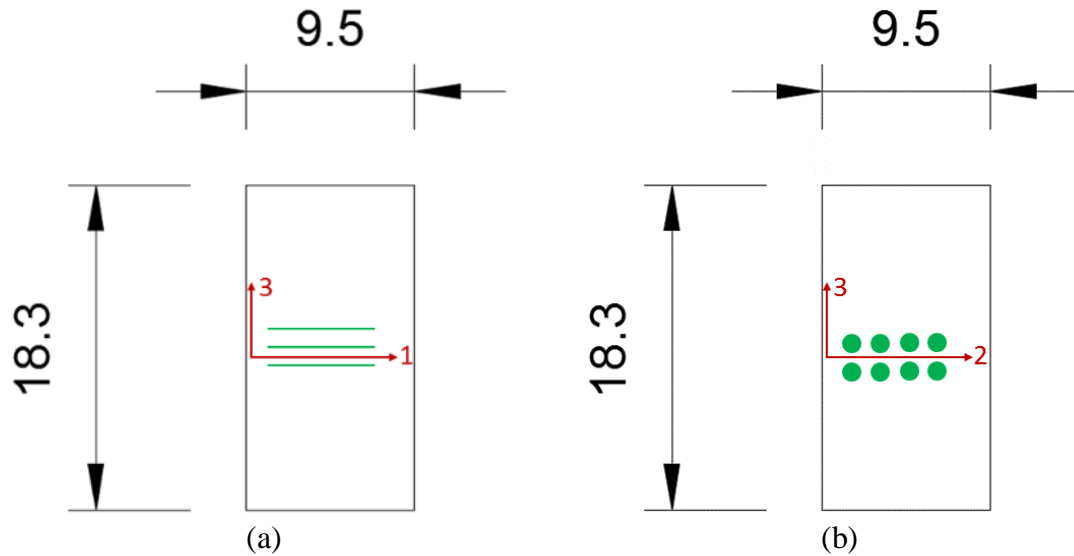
Nominal 3-direction Tension Specimen Dimensions and Layout (a) 1-3 Plane Speckled and (b) 2-3 Plane Speckled (All Dimensions in mm)
